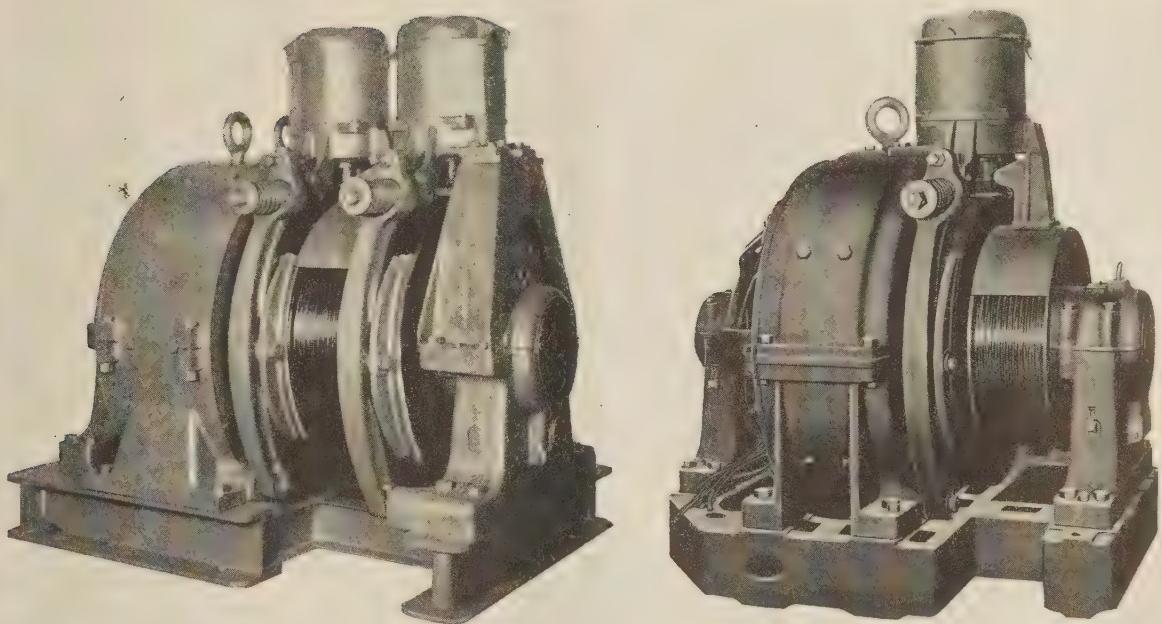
CAST-IRON AND WELDED-STEEL BEDPLATES FOR ELEVATOR MOTORS
